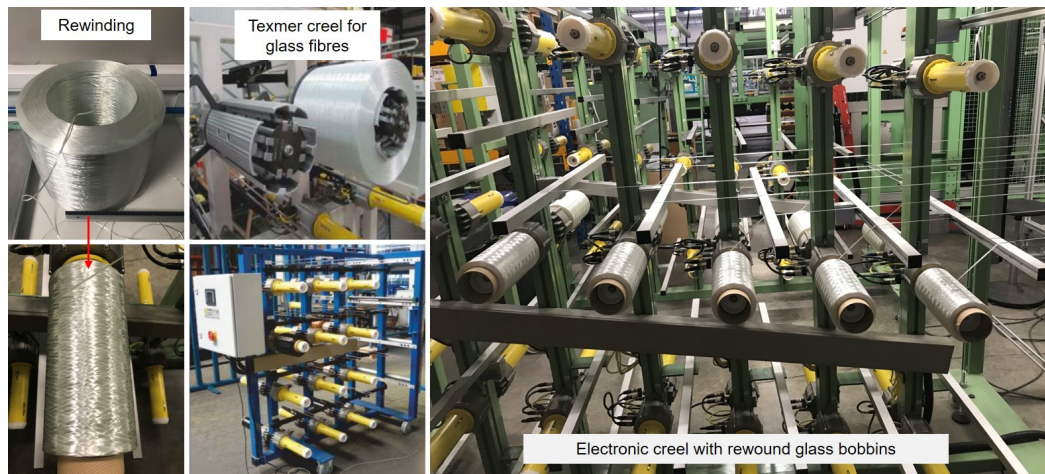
Glass fibre rewinding and creel for the spreading machine.
